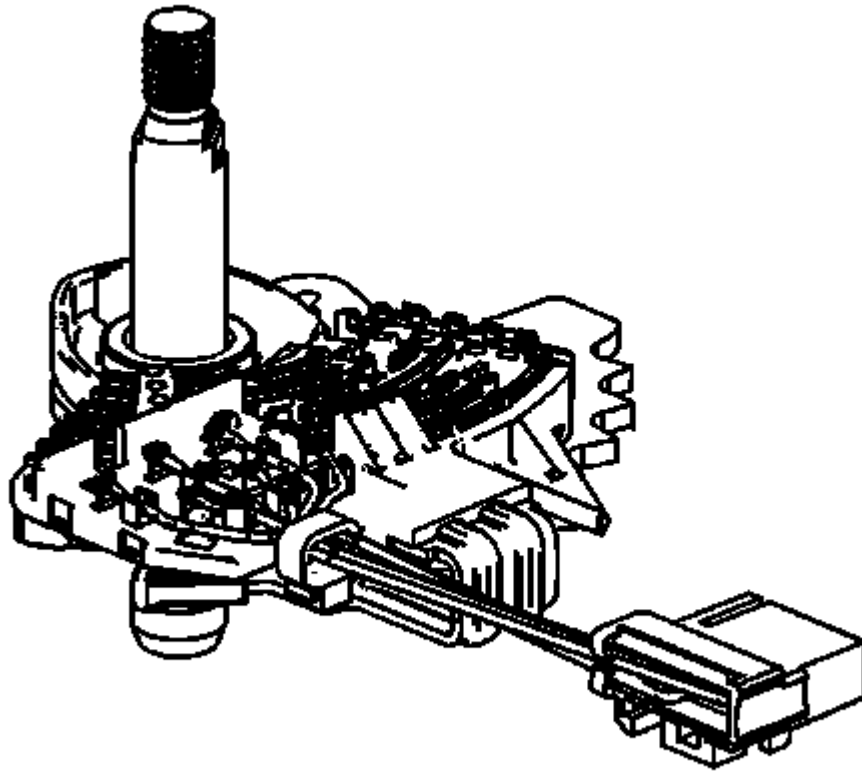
View Of Manual Shift Detent Lever W/ Shaft Position Switch Assembly
